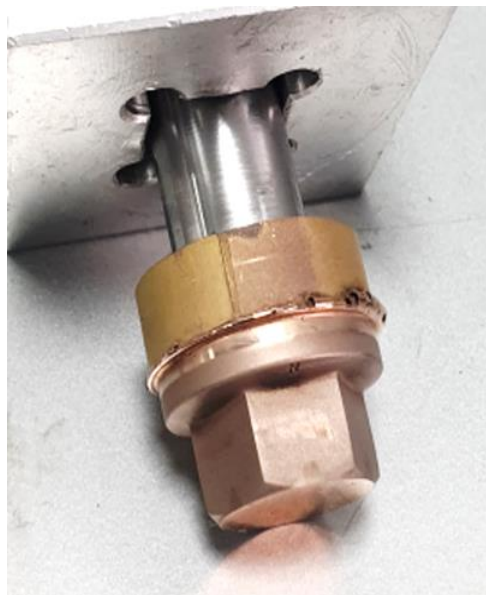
Carbide Alloyed and Radius Formed Copper Electrode
